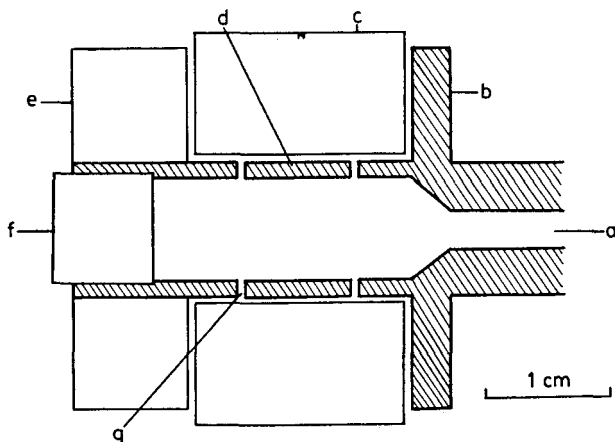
Sectional diagram of brass air bearing pulley. Key: a. compressed air. b. Inner thrust collar. c. Rotor. d. Journal. e. Outer thrust collar. f. Taper screw. g. Journal air hole. For clarity, the thrust and bearing air gaps and the journal holes are not to scale.
